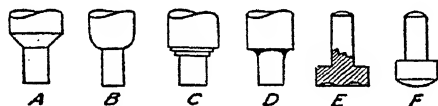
Non-standard cutters that have to be made to suit the particular job in hand.
